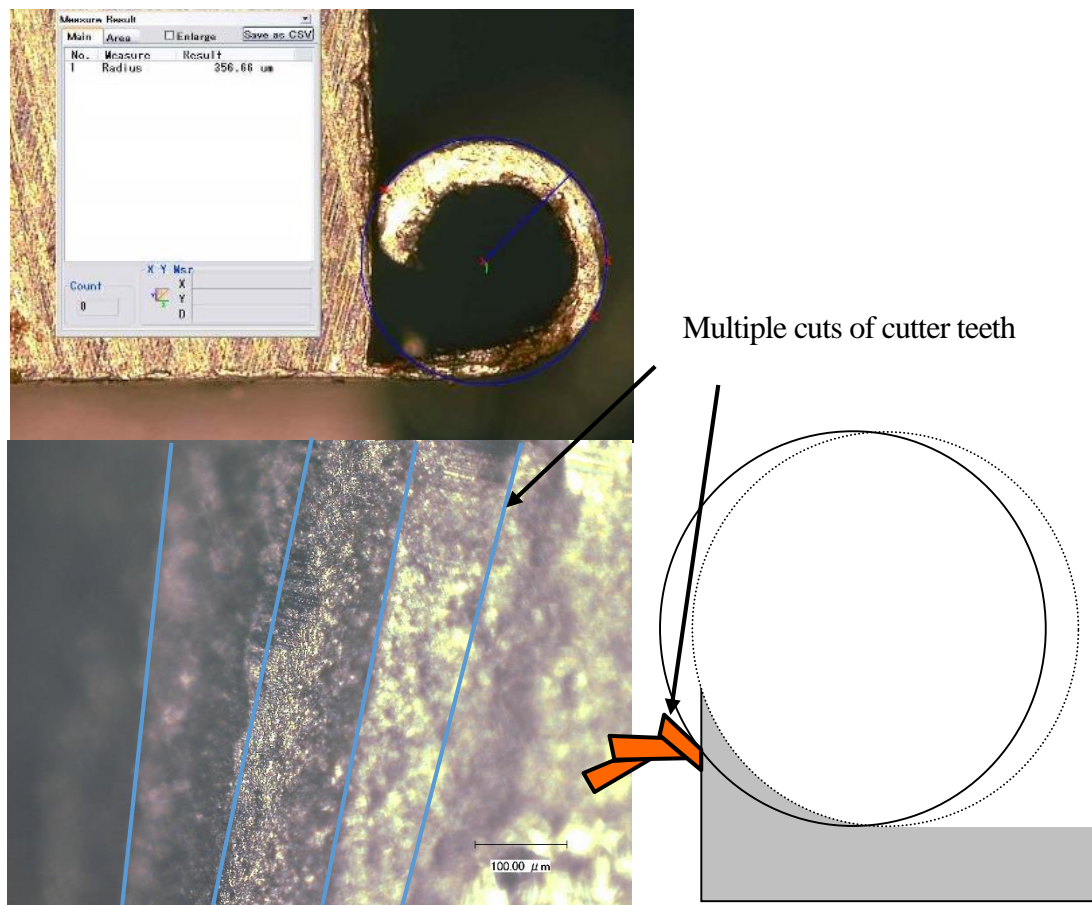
Rollover burr formed at side edge by multiple cuts.
